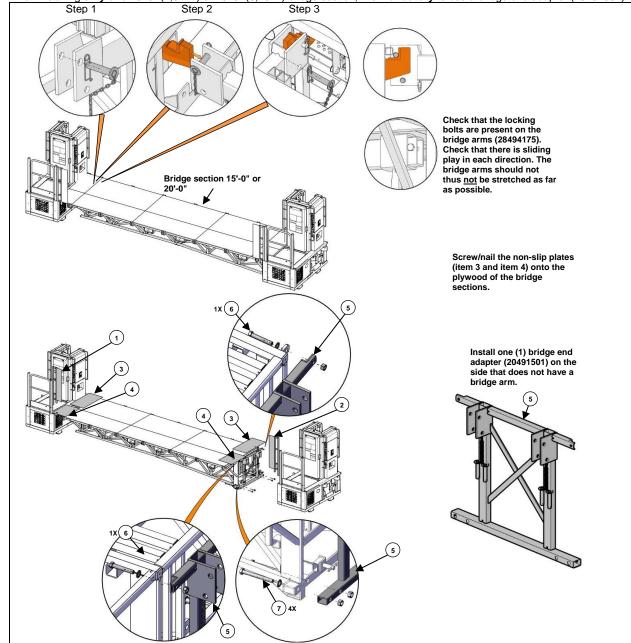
Installation of 15'-0" or 20'-0" bridge section between lifting units
